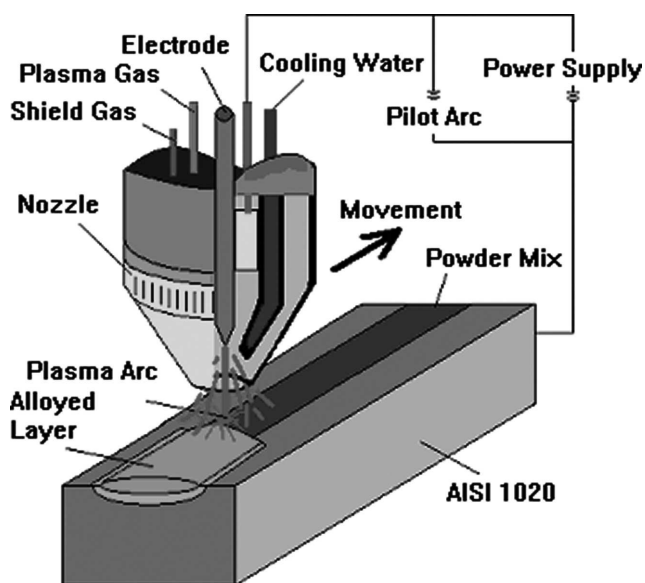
Process diagram of plasma transferred arc welding
